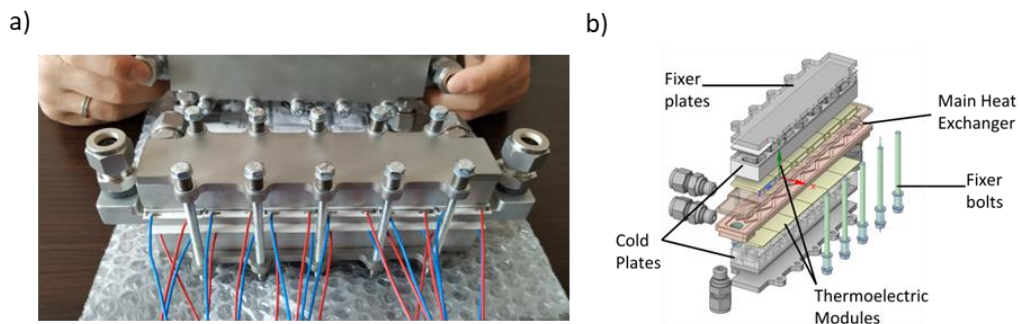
The thermoelectric subcooler assembly: a) fully assembled device and b) assembly view in the 3D designing tool.
